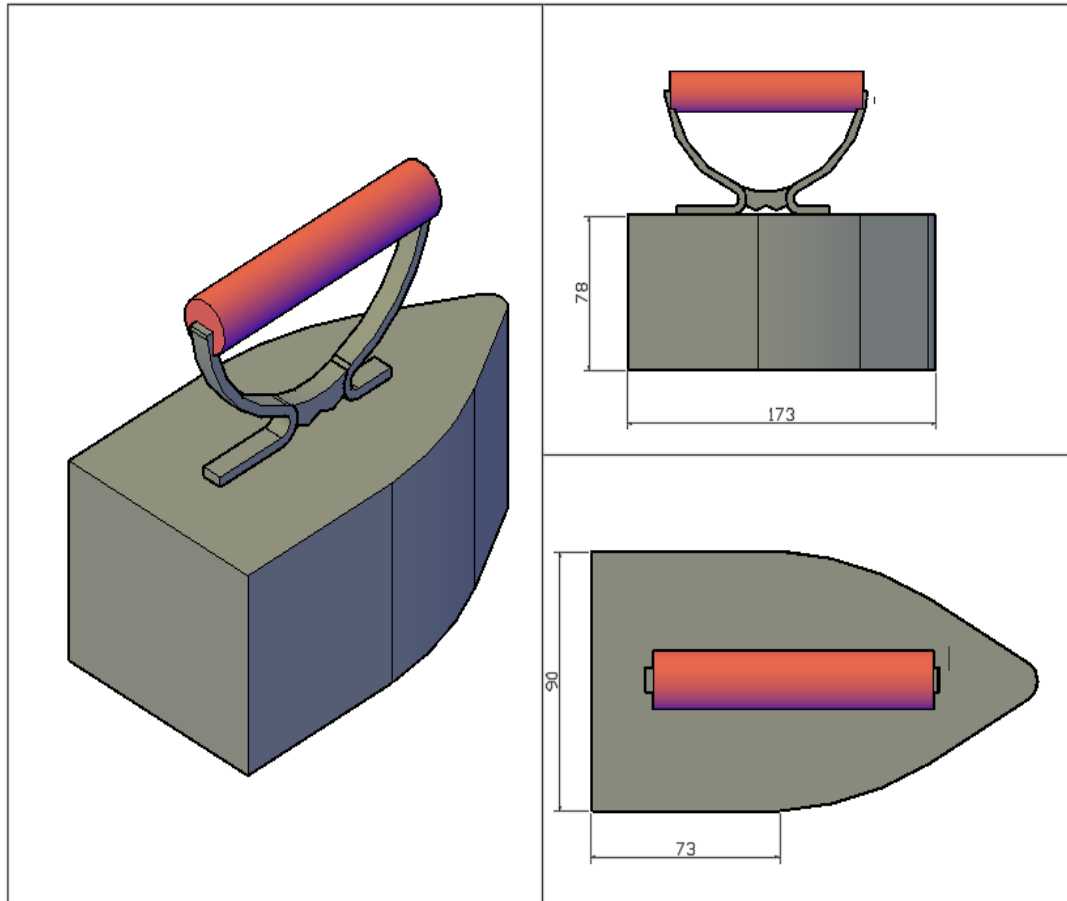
The Fabricated sad Iron (All dimensions in mm)
